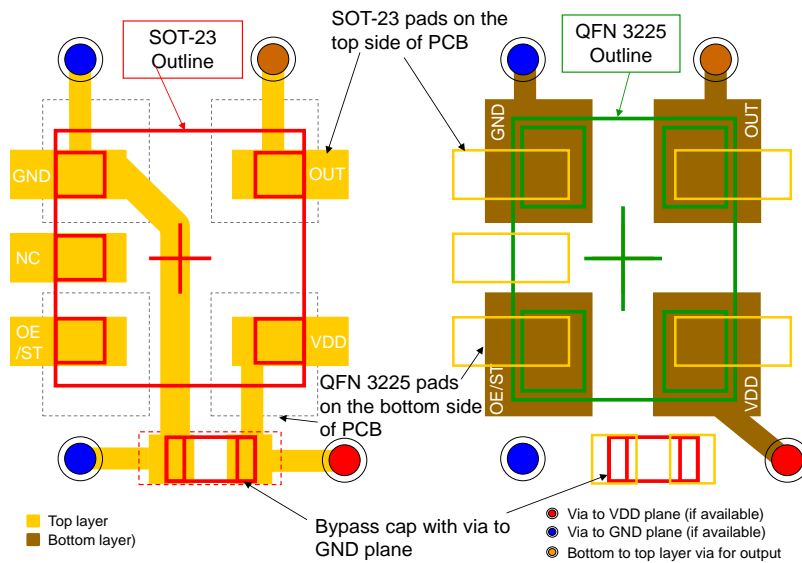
QFN 3225 and SOT23-5 stacked design layout example showing placement of both QFN 3225 and SOT23-5 devices
